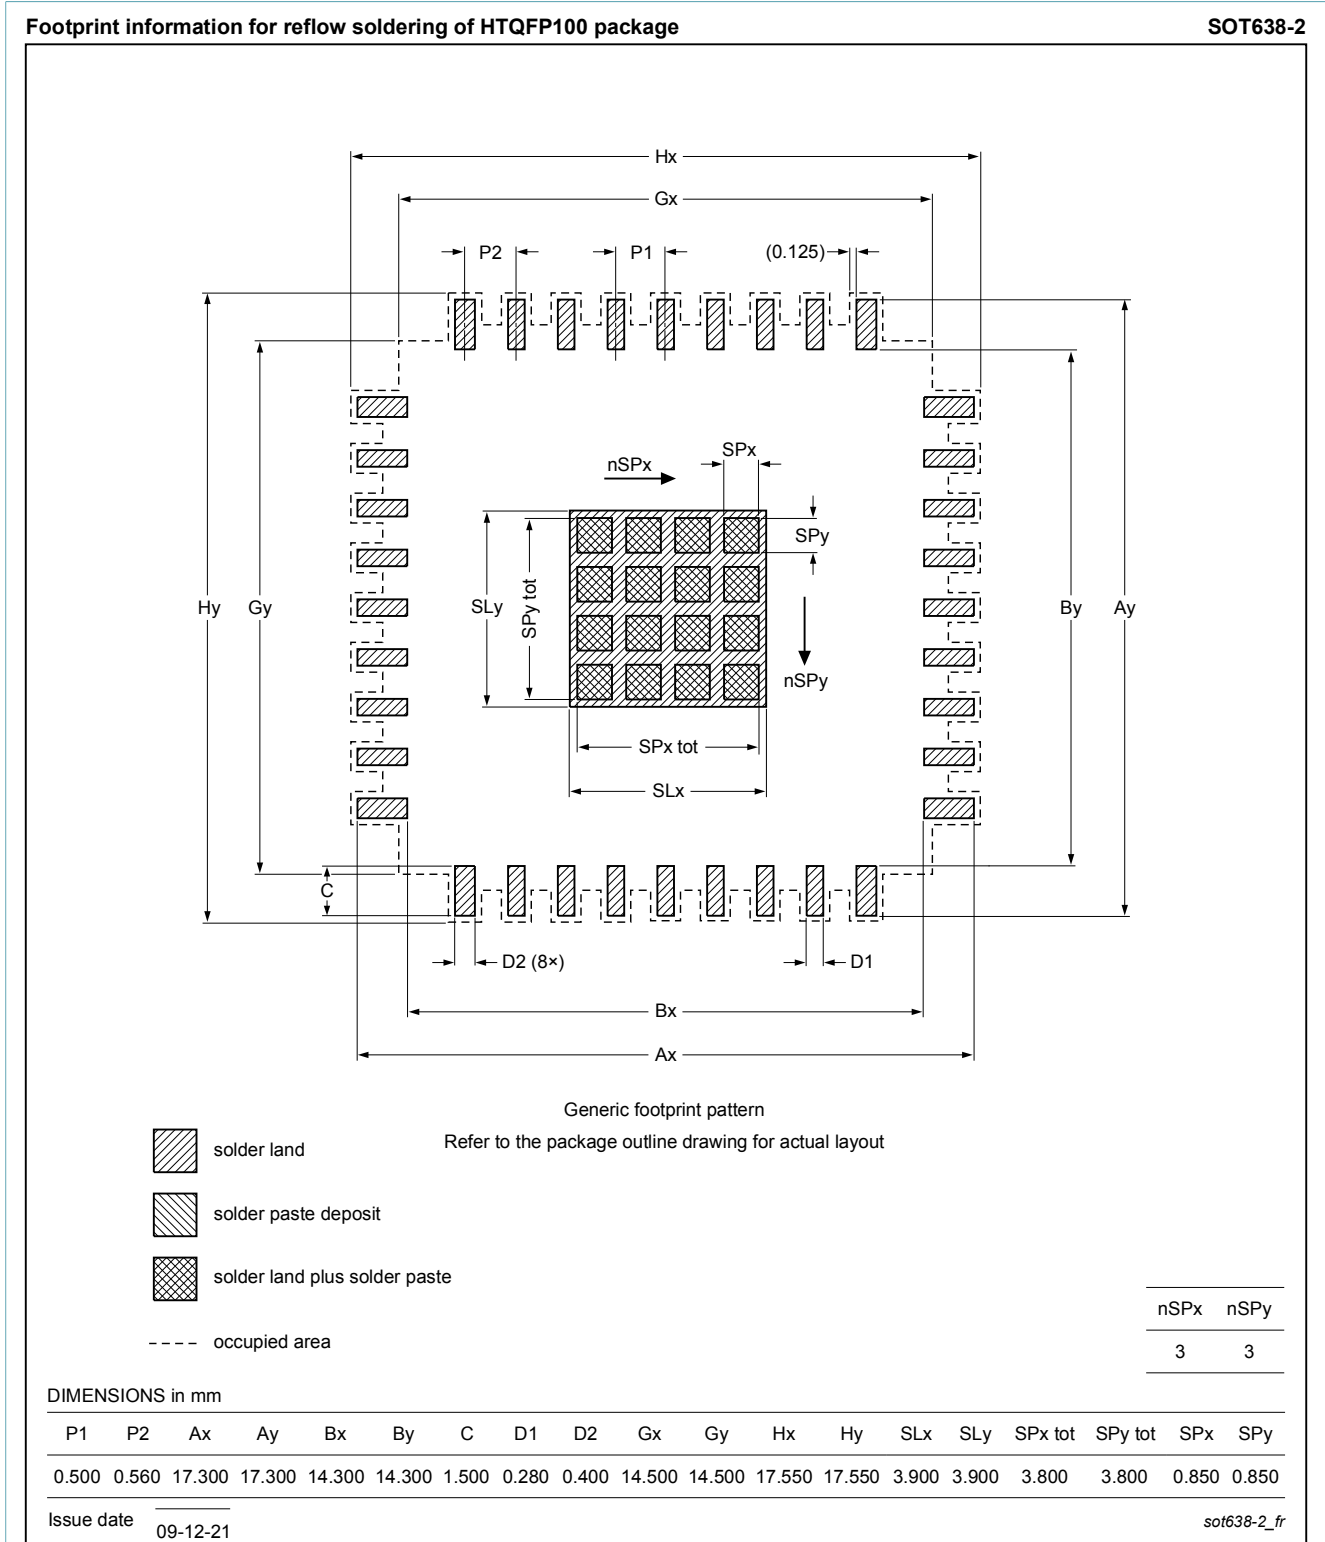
Reflow soldering footprint for HTQFP100 (SOT638-2)
